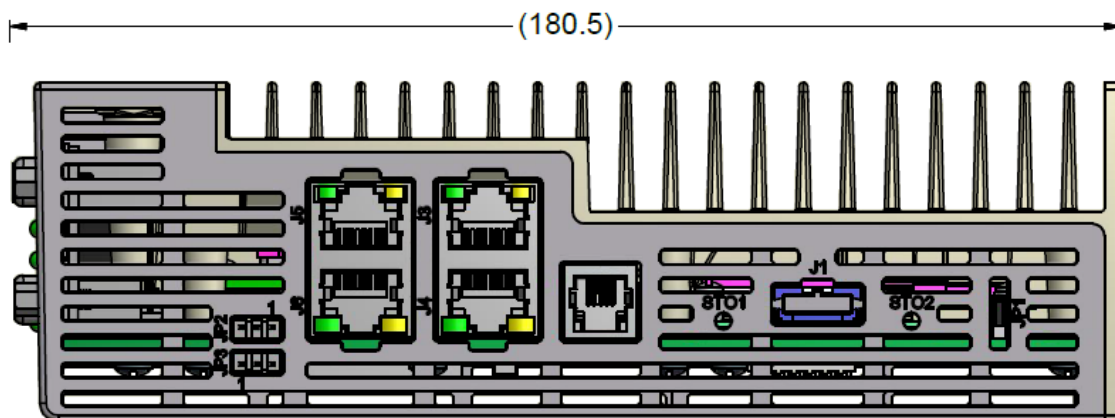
Dimensions - Side (Communications et. al. Connectors) View
